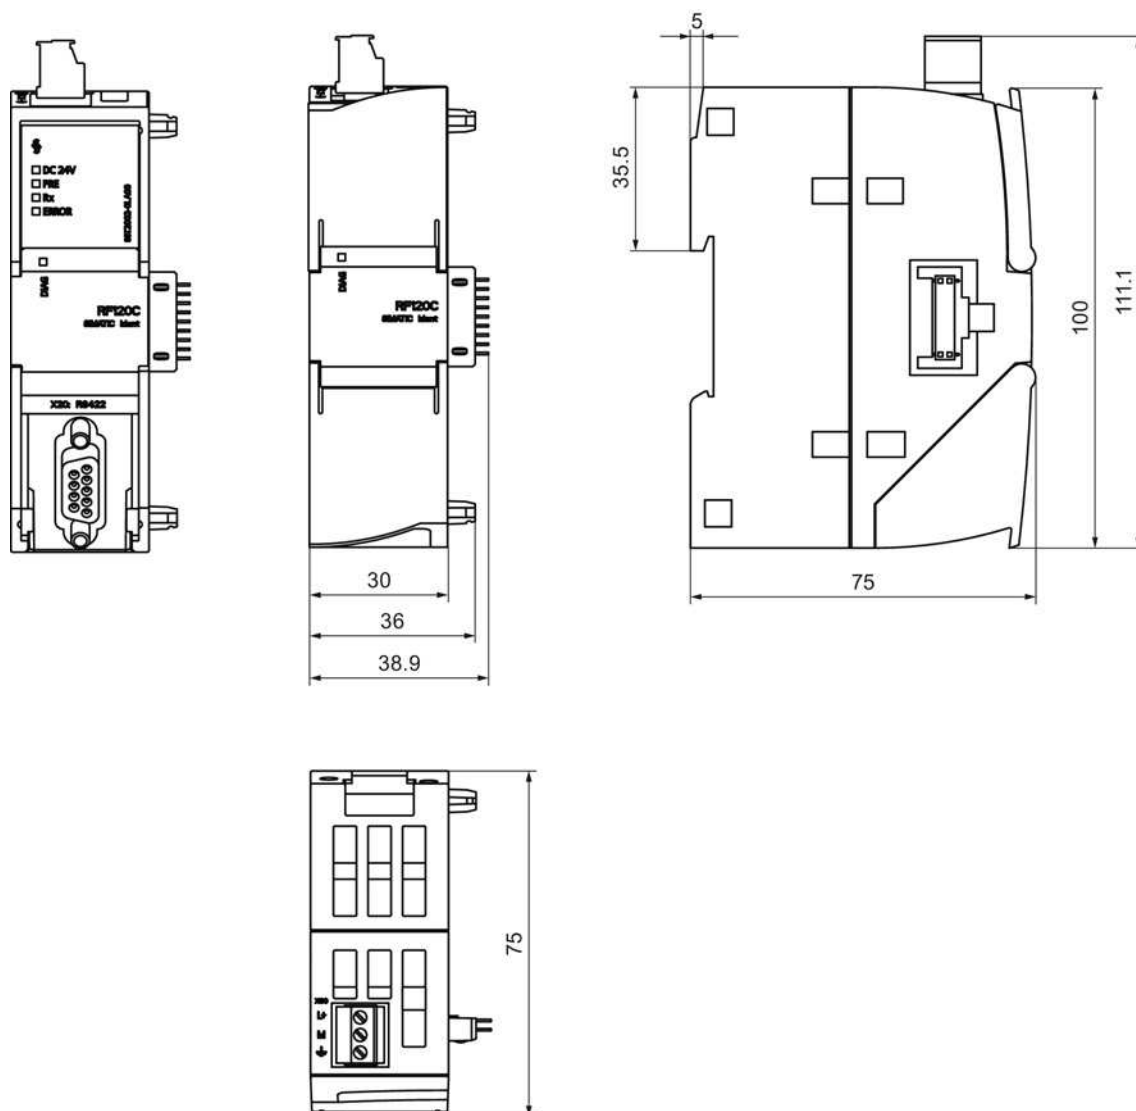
Dimension drawing RF120C communications module (dimensions in mm)
